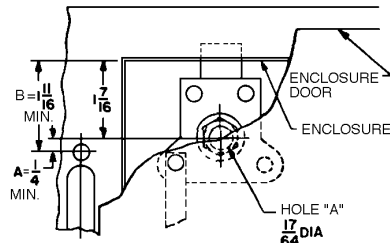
Positioning Roller Latch, B = 1-11/16" to 5-5/16"
